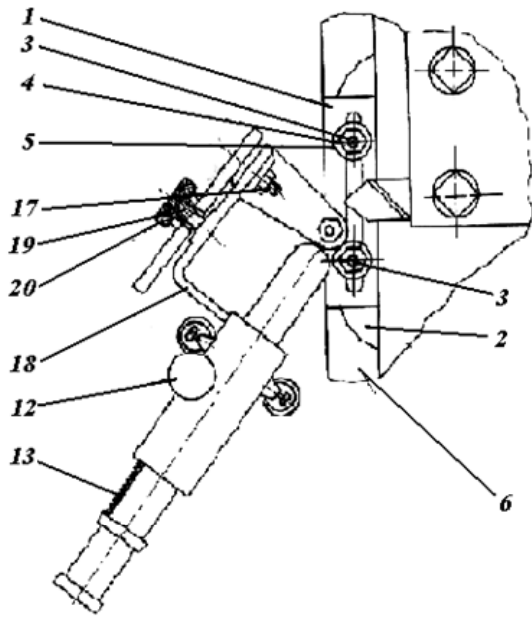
Plan view of the optical device for the study of the lathe tool wear
